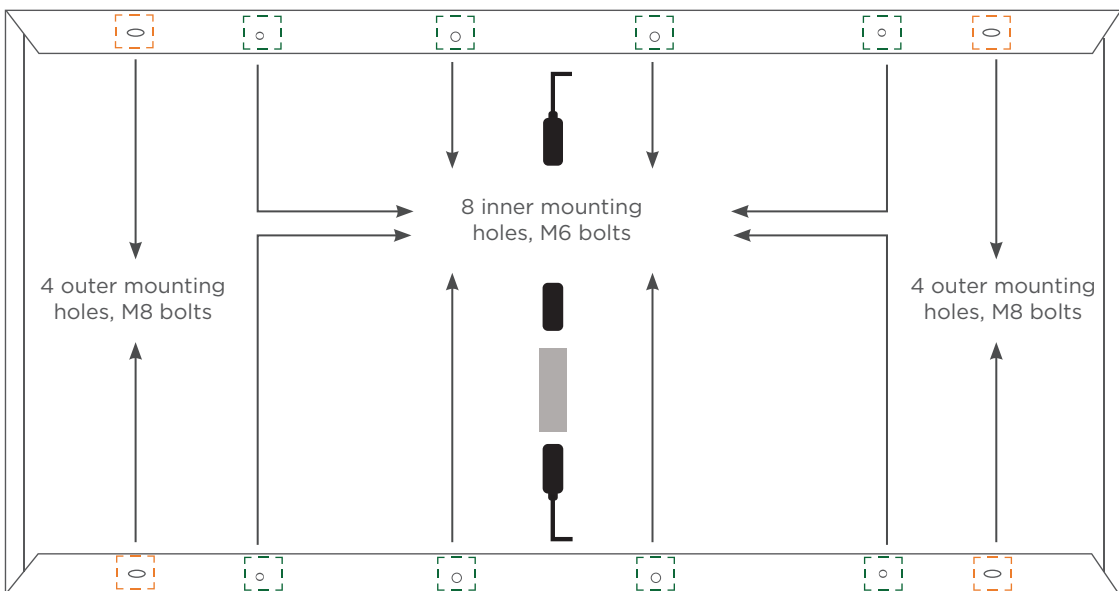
Mounting hole position of bolt mounting for module model RPS3MH66BDXXX only
